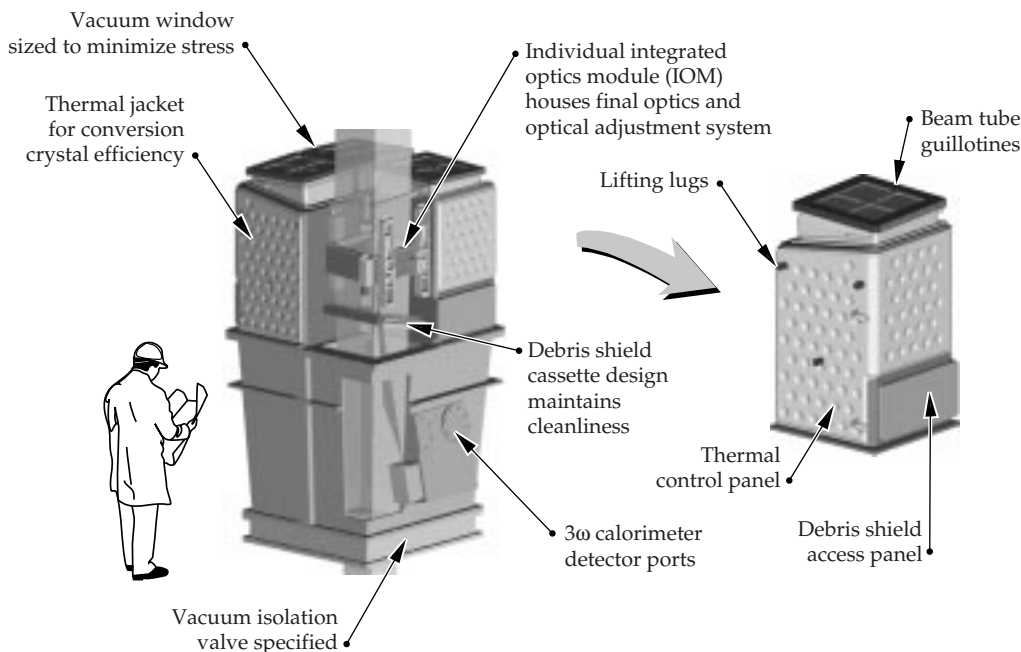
The final optics assembly is an integrated optomechanical design package. (40-00-1097-2269pb01)
